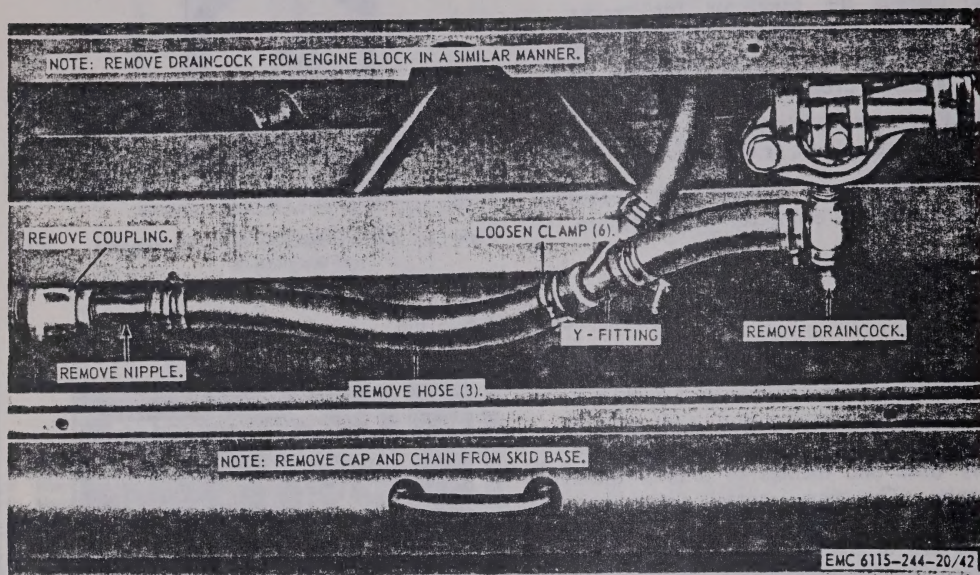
Coolant draincocks, drain hoses, and fittings, removal and installation.
